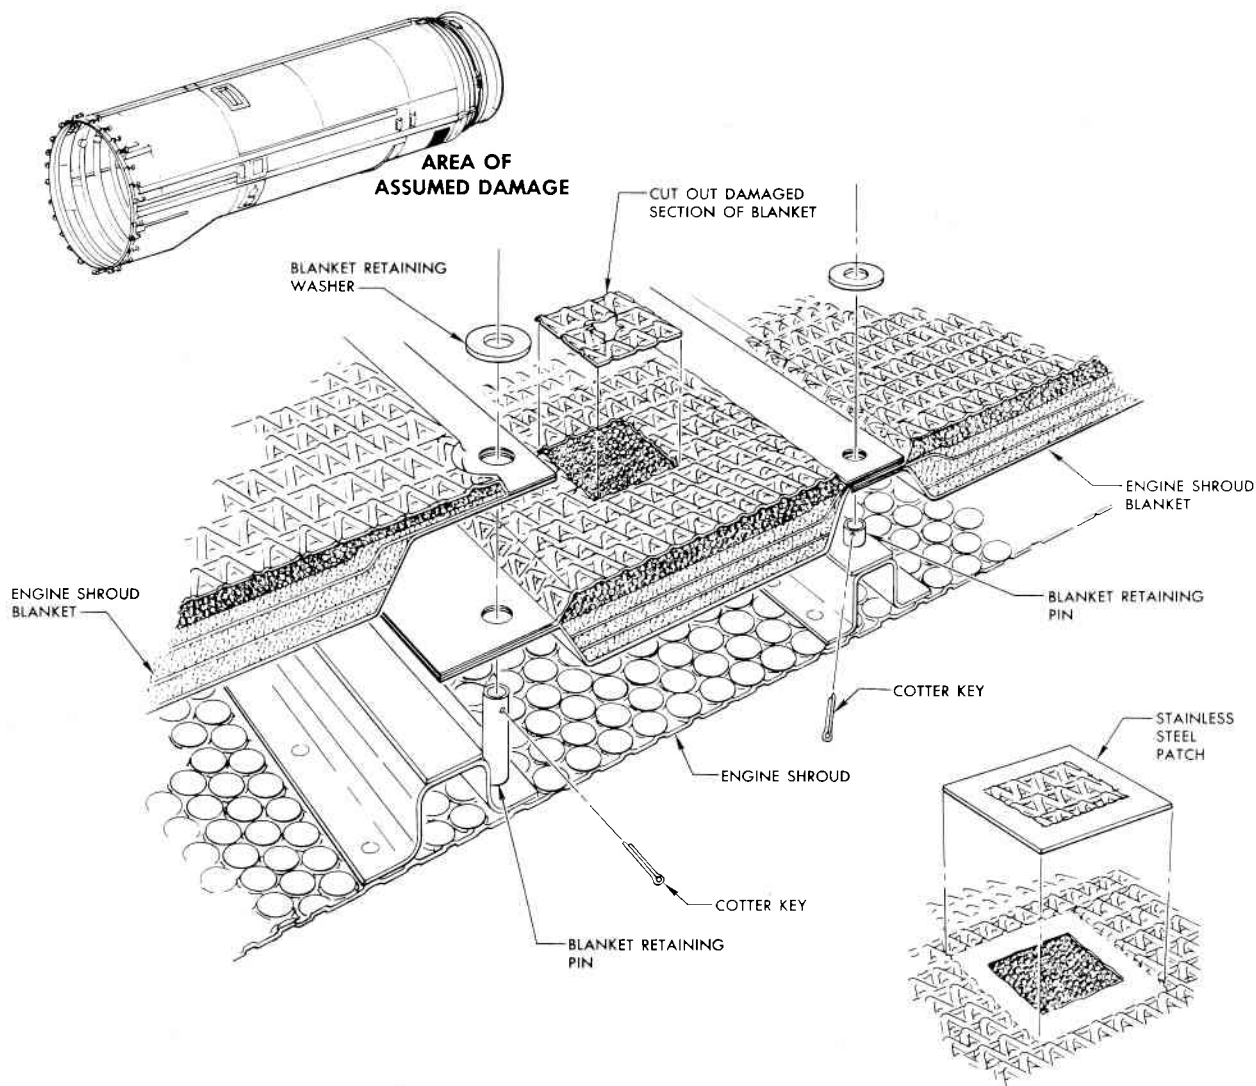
Engine Shroud Seal Repair (Sheet 1 of 2)
